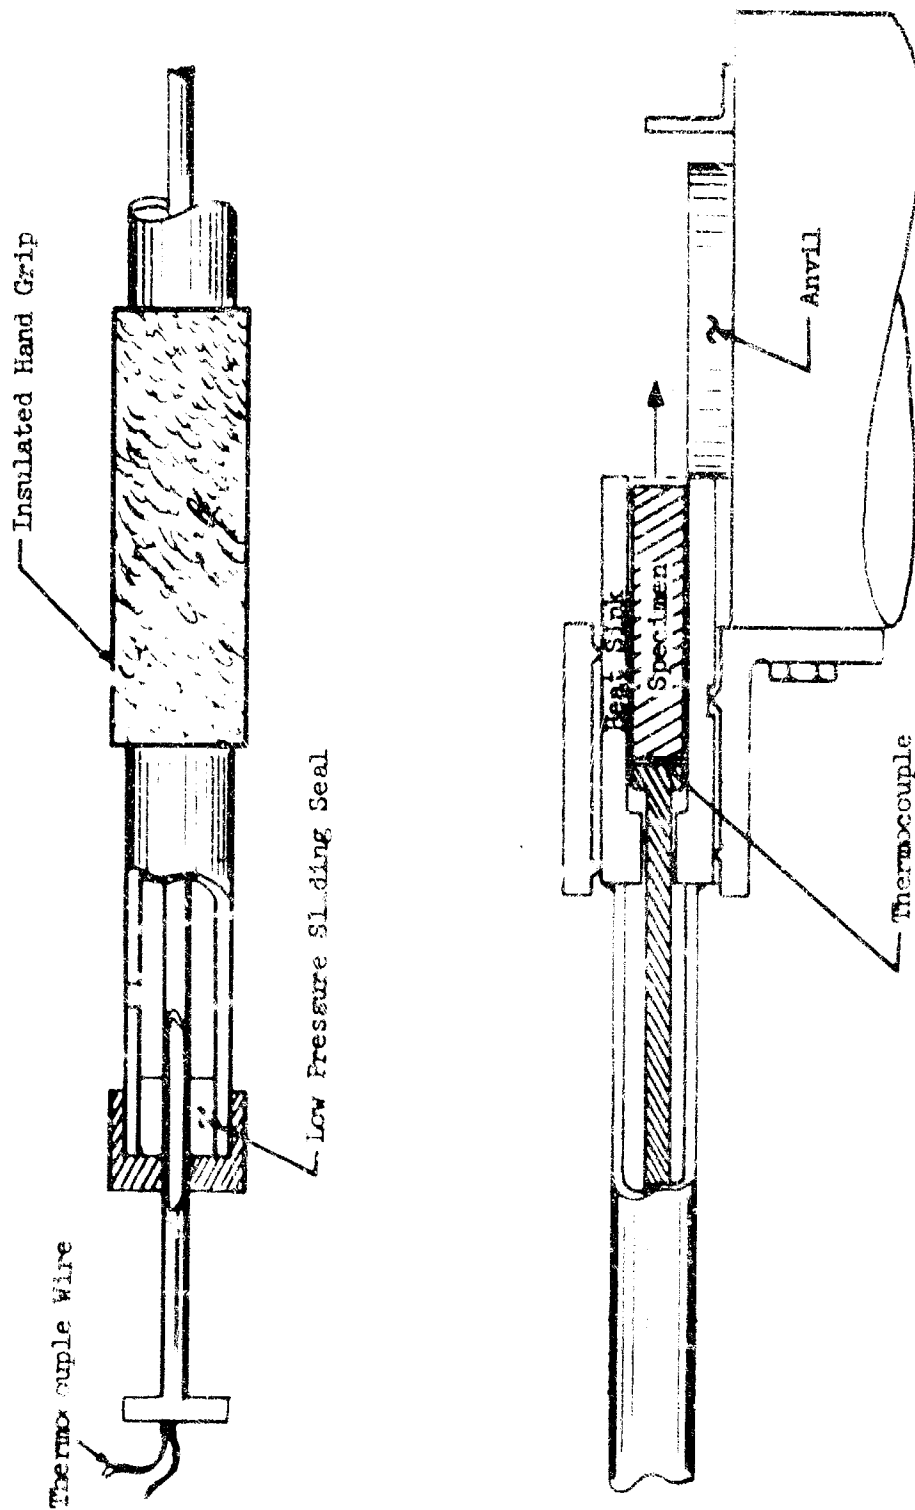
BAR SPECIMEN LOADING TOOL.
